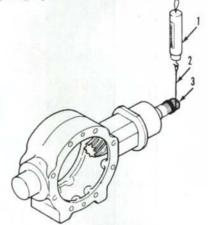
Wrap a cord (2) around pinion shaft (3) and use a spring scale (1) to check pinion rolling torque. Refer to text for adjustment.
